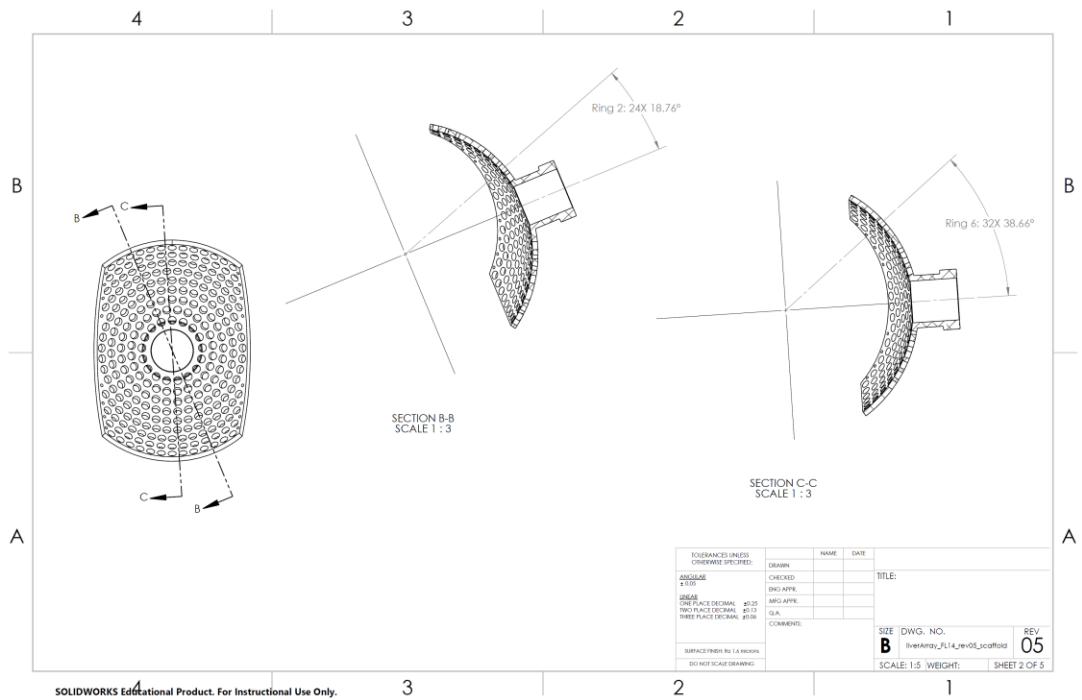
2. Technical drawing of liver array scaffold. Sheet 2 of 5.
